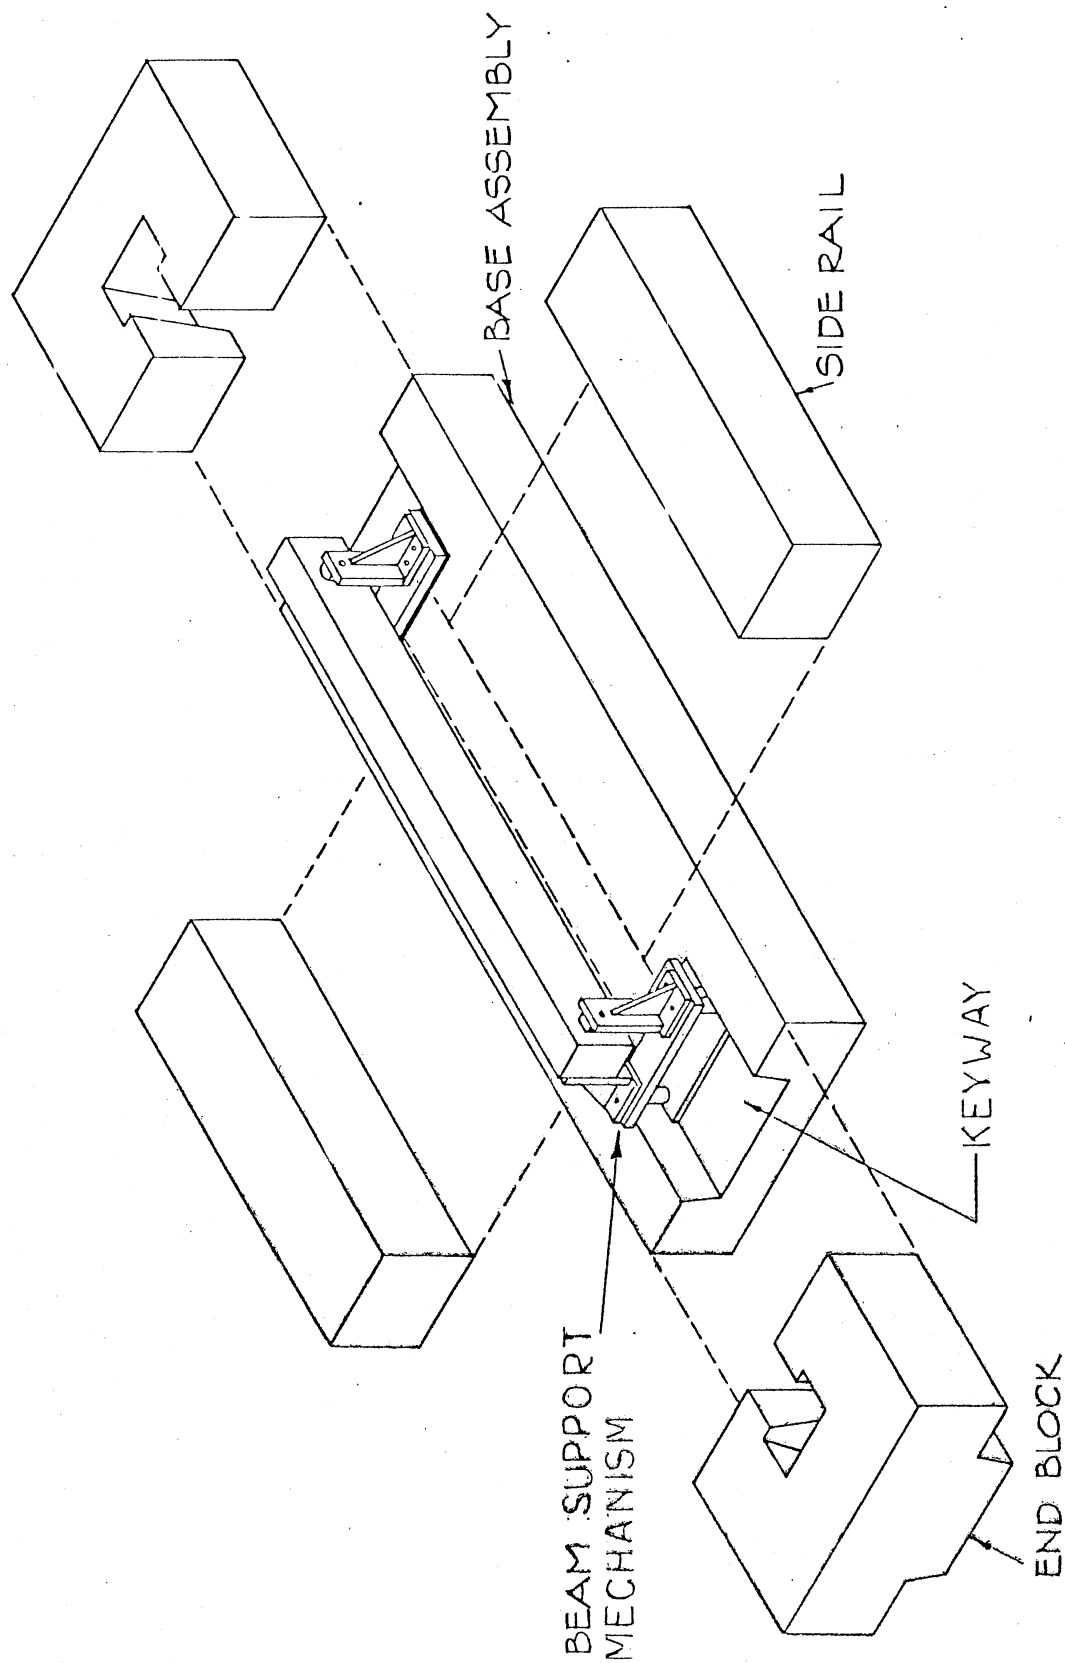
Test Fixture With Beam Installed on Support Mechanisms
